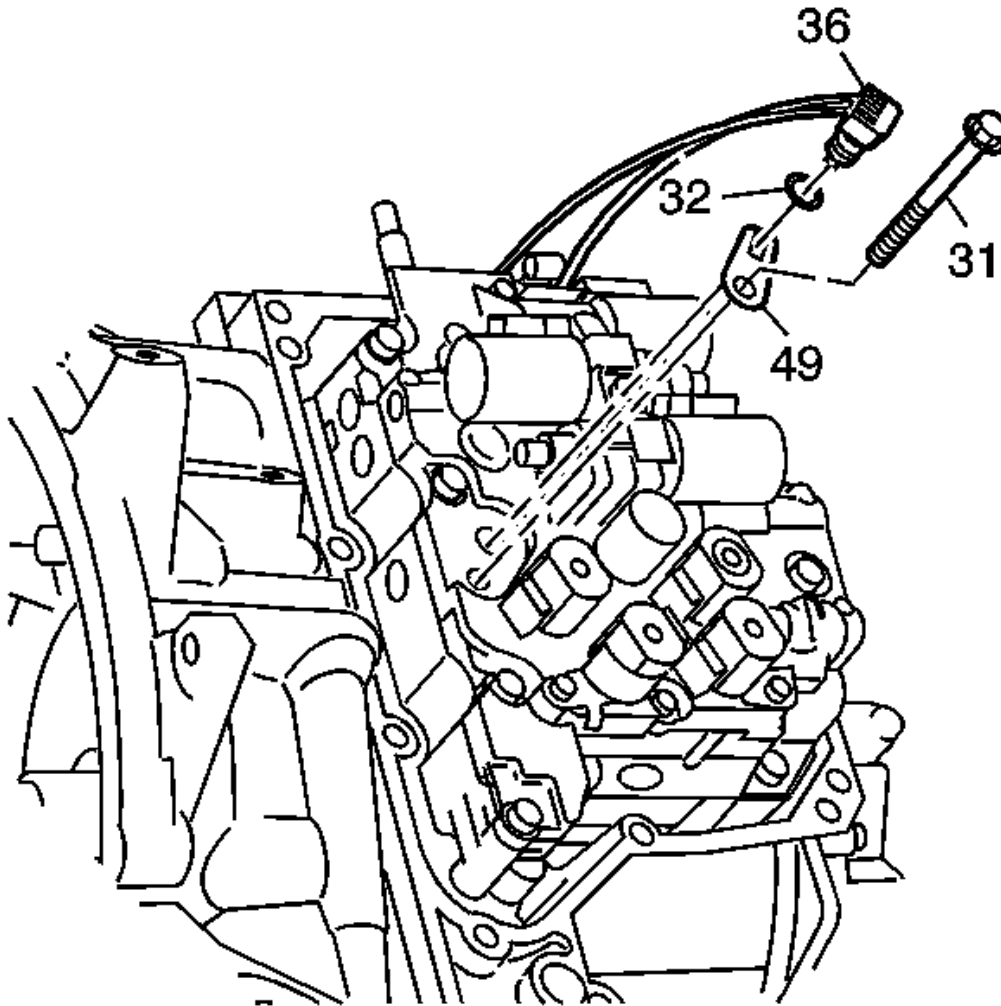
Identifying Wire Harness Retainer & TCM Electrical Connector
